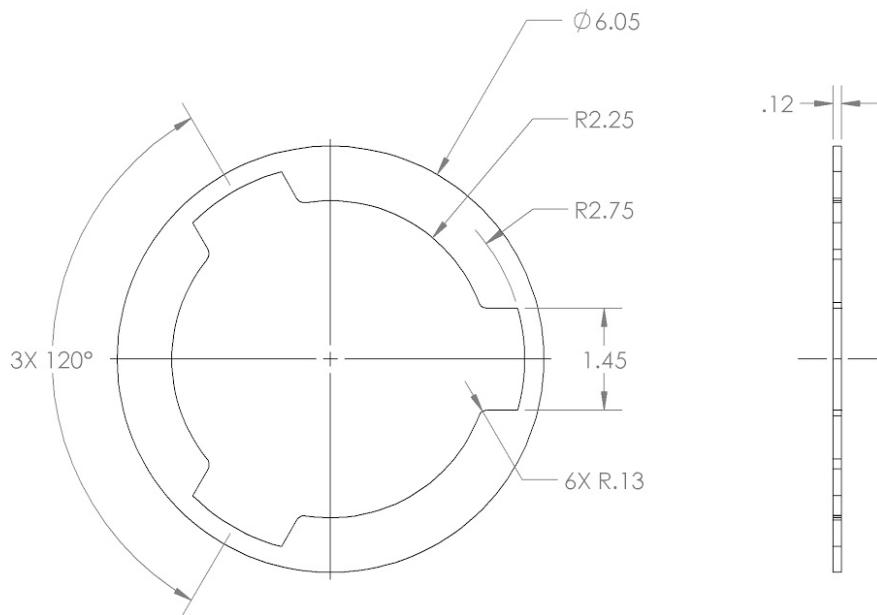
Locking Mechanism Outer Ring Reinforcement Drawing
